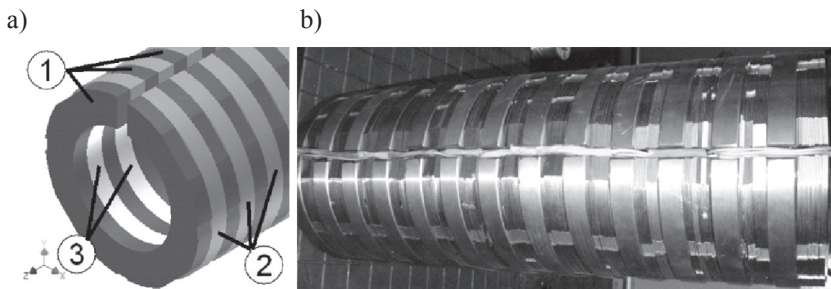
Module LM: a) perspective computer view, b) constructed prototype
